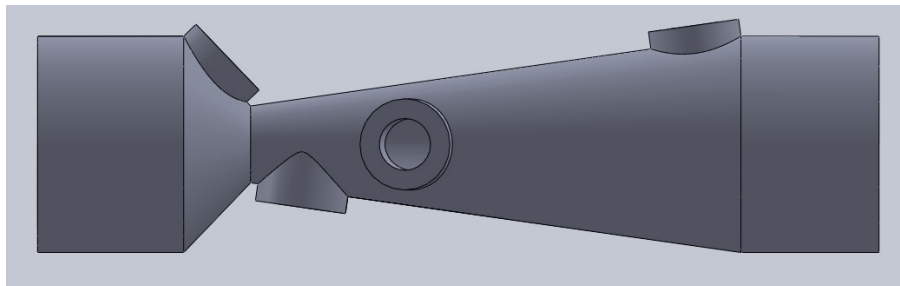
Solidworks drawing of converging – diverging conical nozzle
